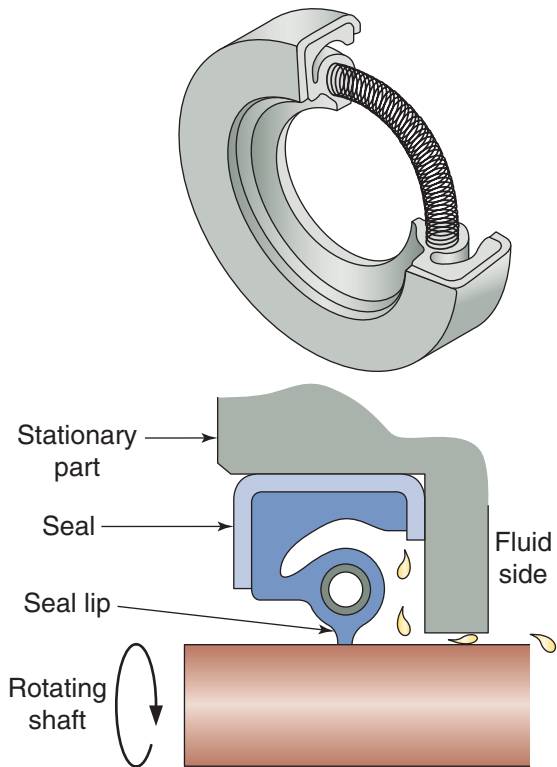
Seals are used to keep oil in the engine and wherever rotating parts are found.
